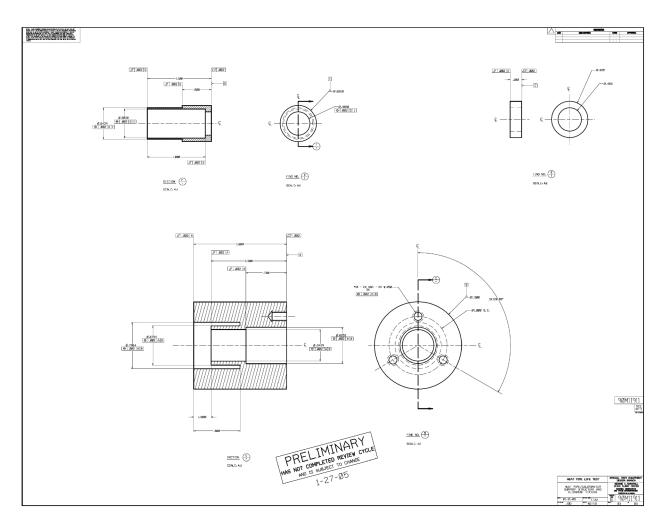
Heat pipe and calorimeter mounting bracket detail (Dwg. No. 90M11911).
